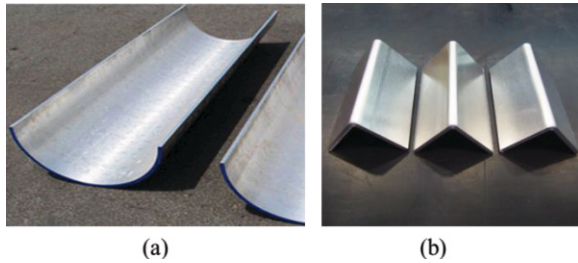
(a) Savonius rotor blades (b) Darrieus rotor blades
